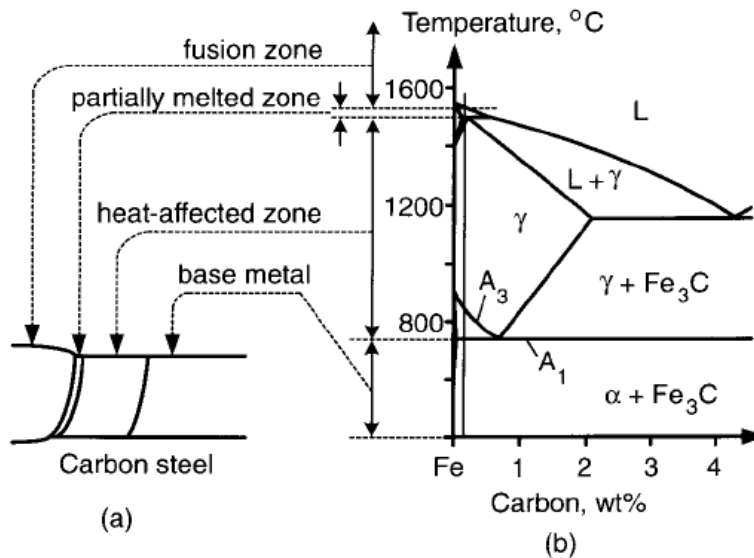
Carbon steel weld: (a) HAZ; (b) phase diagram.
